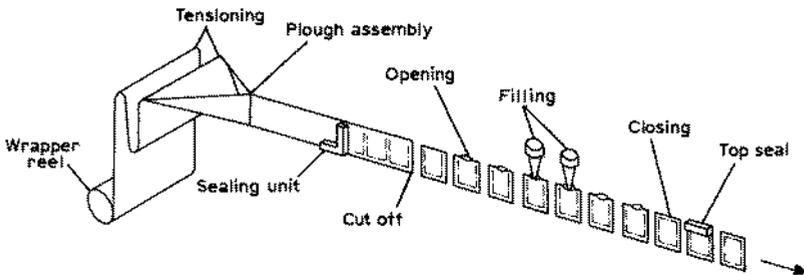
Horizontal form-fill-seal machine for sachets; adapted from [16] with permission.
